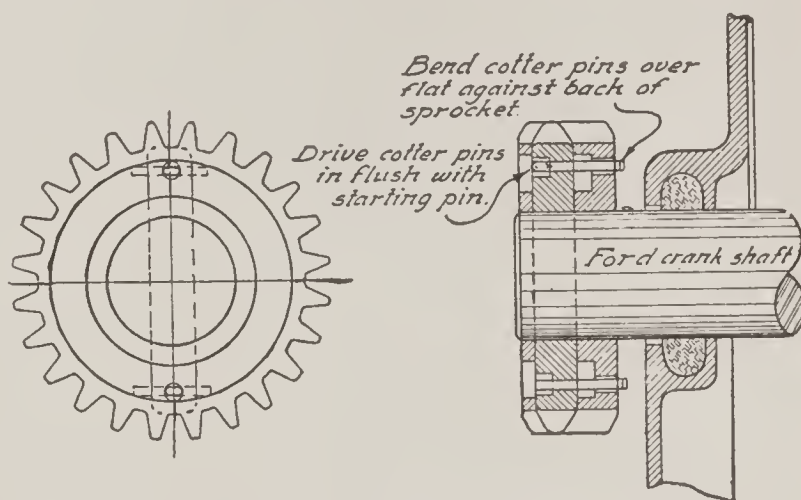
Correct Heinze-Springfield Assembly of Crankshaft Sprocket
